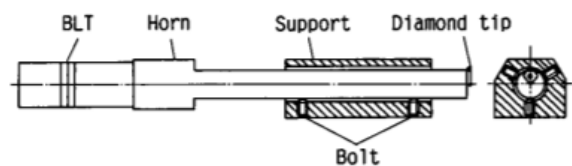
Drawing of ultrasonic vibration tool [24]
